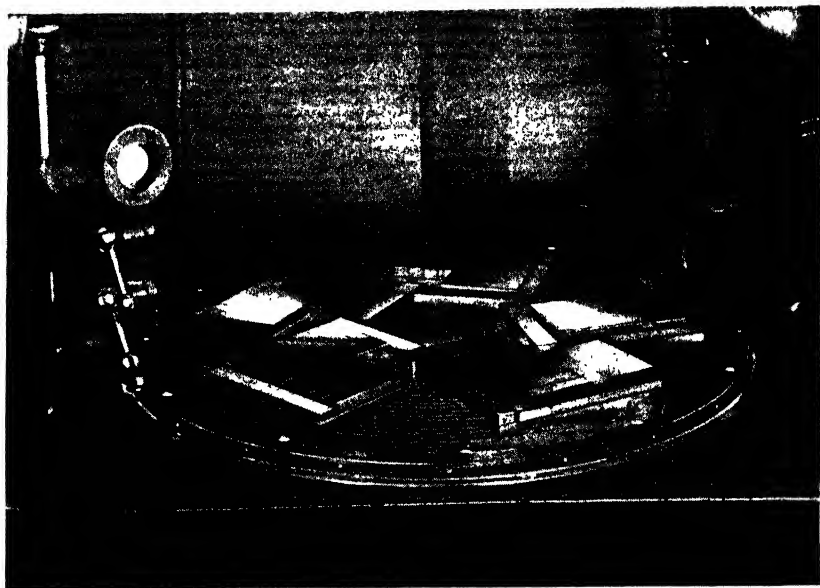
Grinding Sixty Rectangular Blocks of Steel
